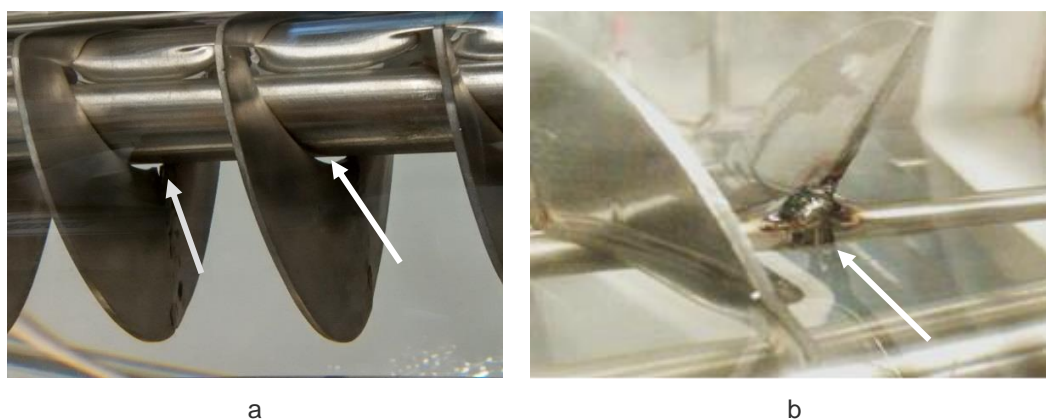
Manufacturing defects during the fabrication of spiral impellers
